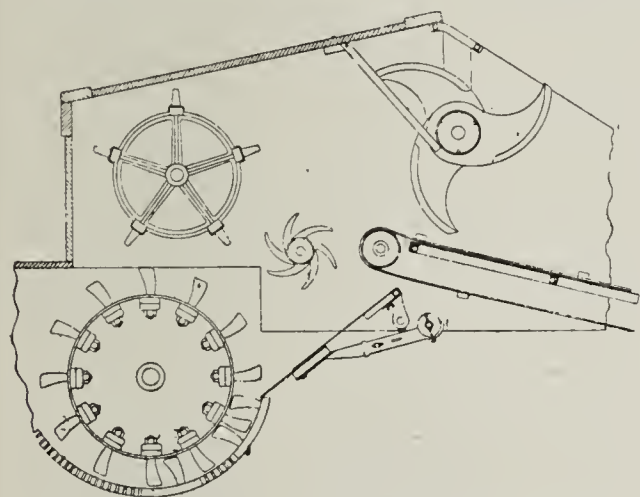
SECTIONAL DRAWING OF RUTH FEEDER.
